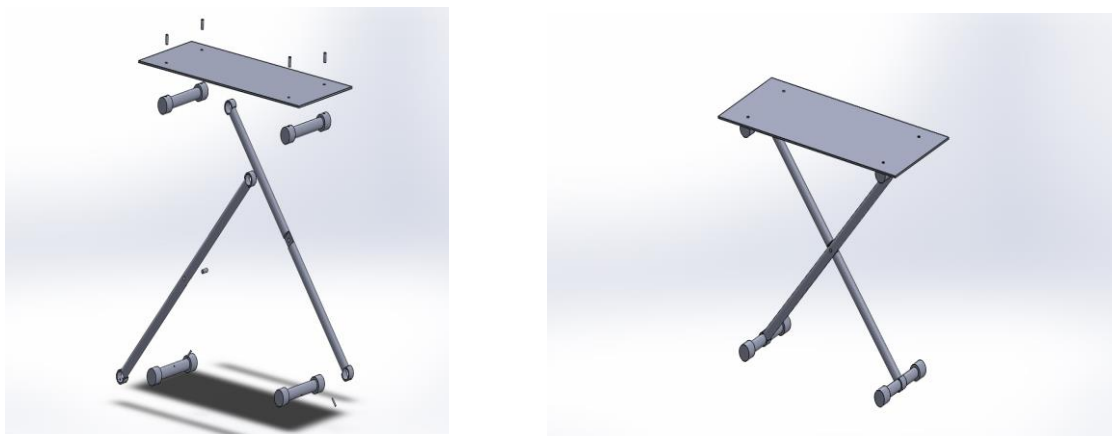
Assembly model for the iron board: (a) exploded view and (b) assembly view.
